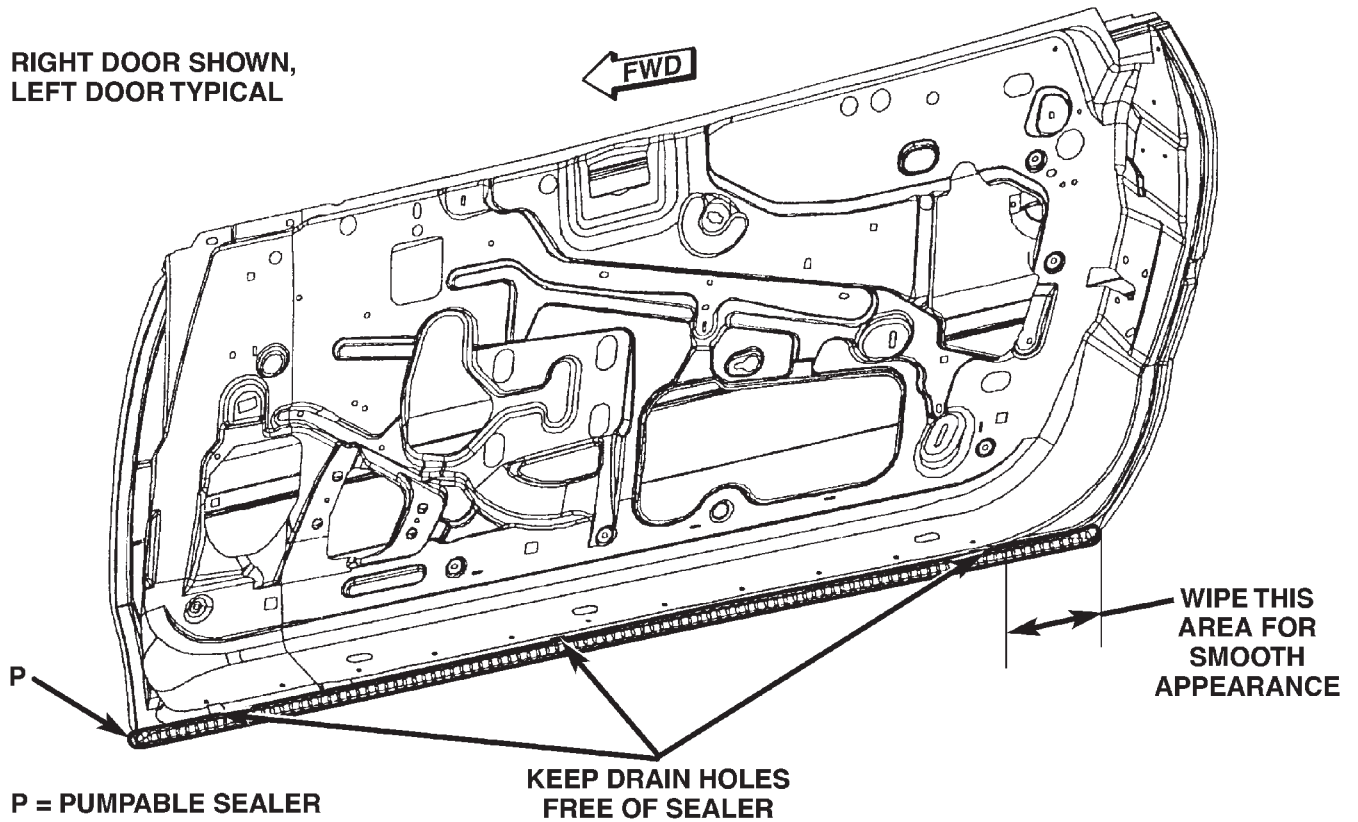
FRONT DOOR LOWER HEM FLANGE
